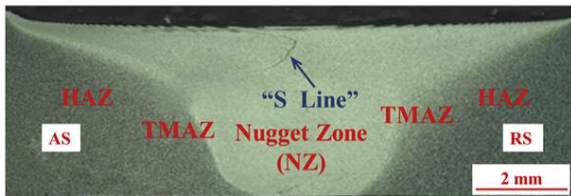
AA5754 Aluminum sheets welded by friction stir welding FSW (RS) retreating side and (AS) advancing side [11].
